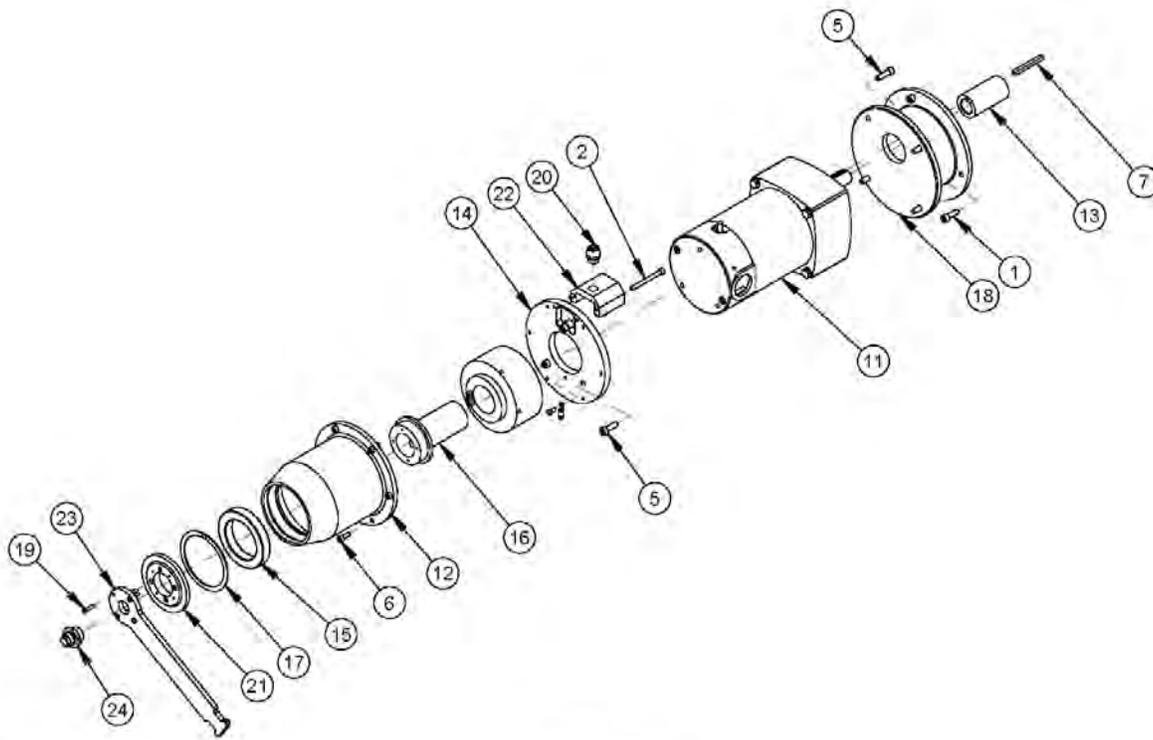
ELECTRIC AXIAL FEED ASSEMBLY (P/N 41062)
